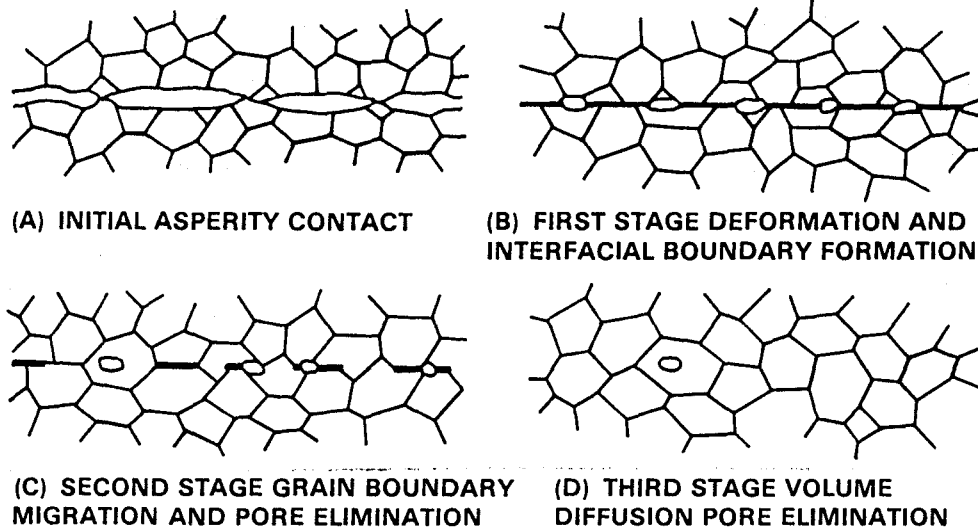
Three-Stage Mechanistic Model of Diffusion Welding
